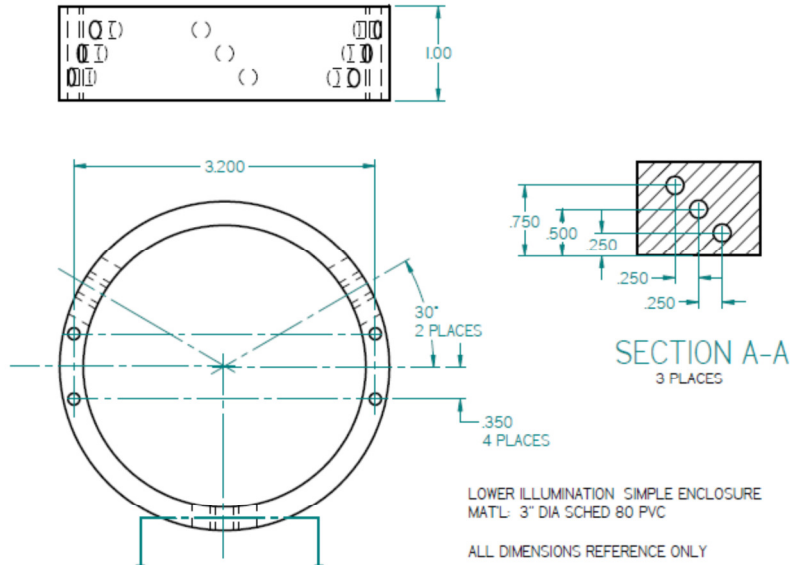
Dimensioned Drawing of the Lower Illumination Fixture
